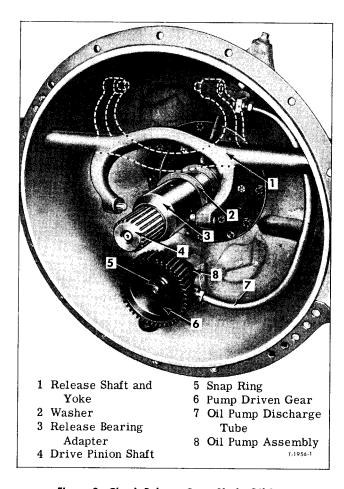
Clutch Release Cross Shaft, Oil Pump Driven Gear, and Discharge Tube Installation
